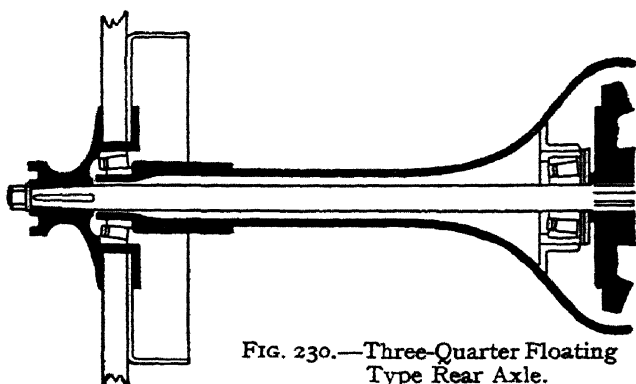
Three-Quarter Floating Type Rear Axle.
